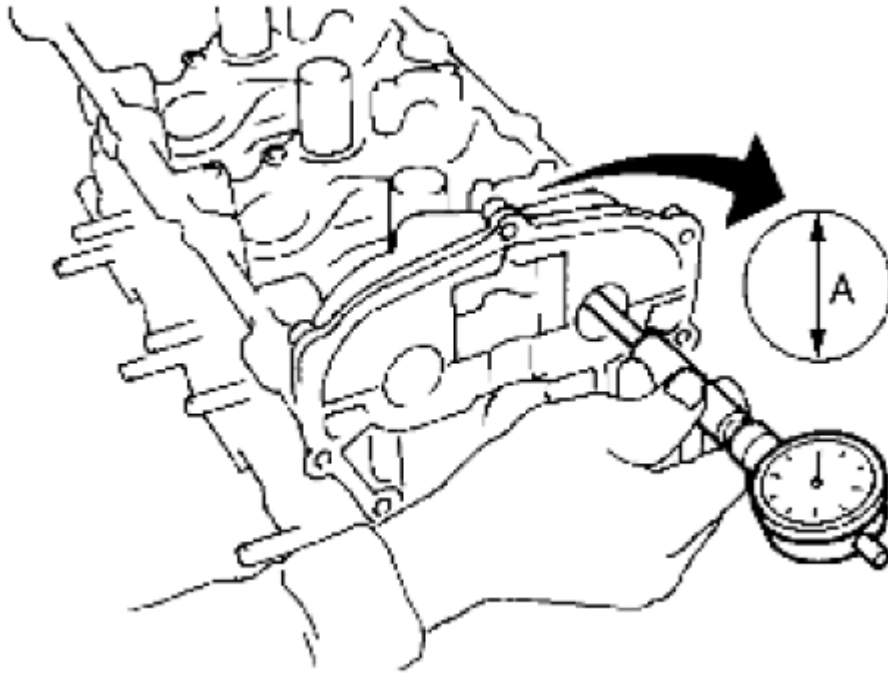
Measuring Inner Diameter "A" Of Camshaft Bracket With Bore Gauge
